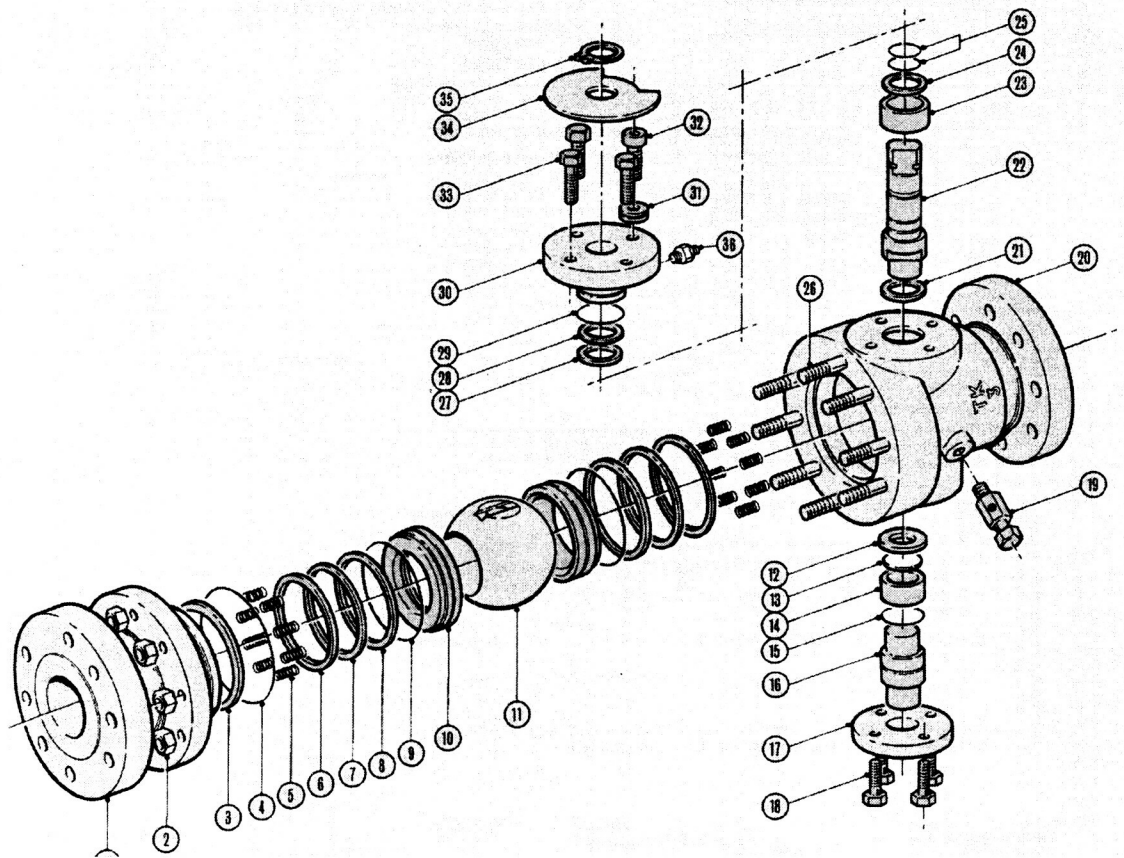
Exploded view of TK ball valves POV-4 and POV-5.
